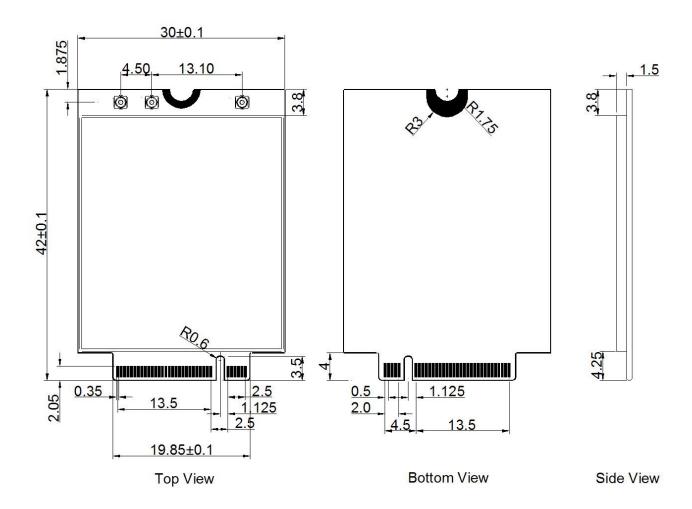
Mechanical Dimensions of EM12-G (Unit: mm)
